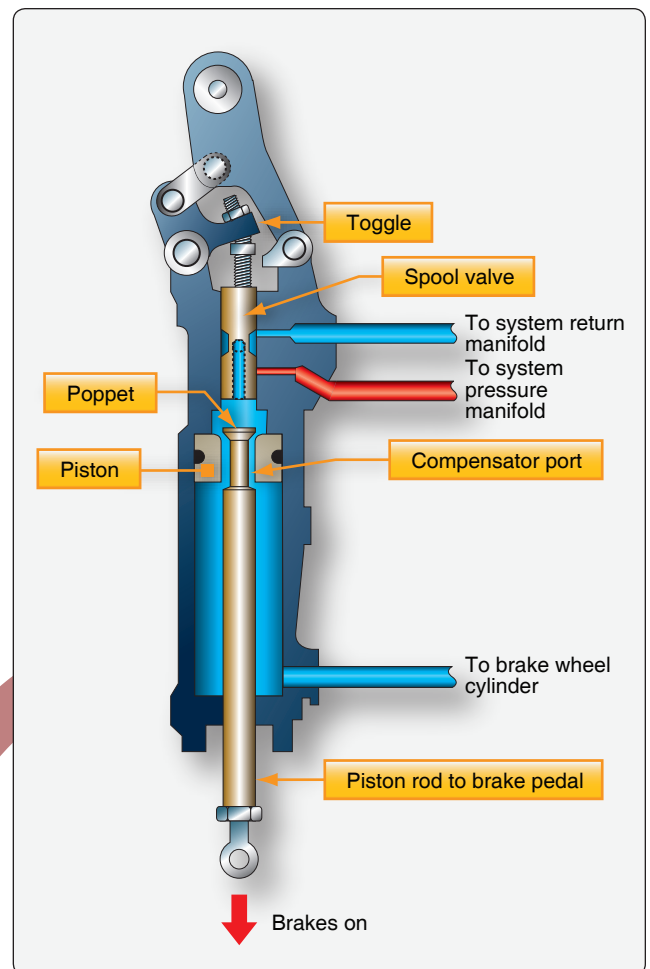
A master cylinder for a boosted brake system augments foot pedal pressure with aircraft system hydraulic pressure during heavy braking.
